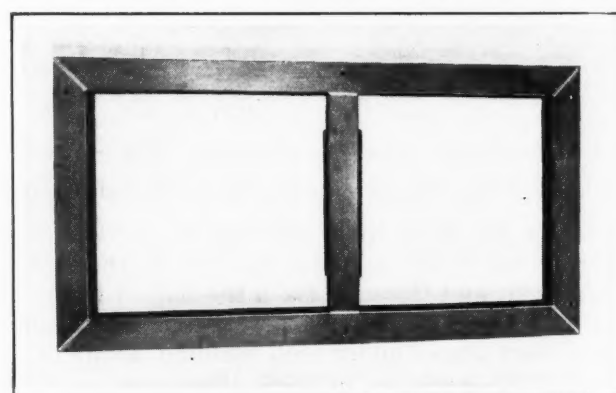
Type of Welded Base that is Less Rigid than the Designs Shown in the Preceding Illustrations
